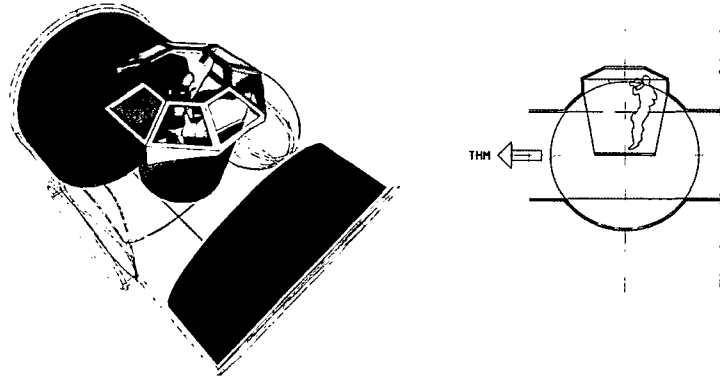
8: Baseline Design Front Node - Drawing
